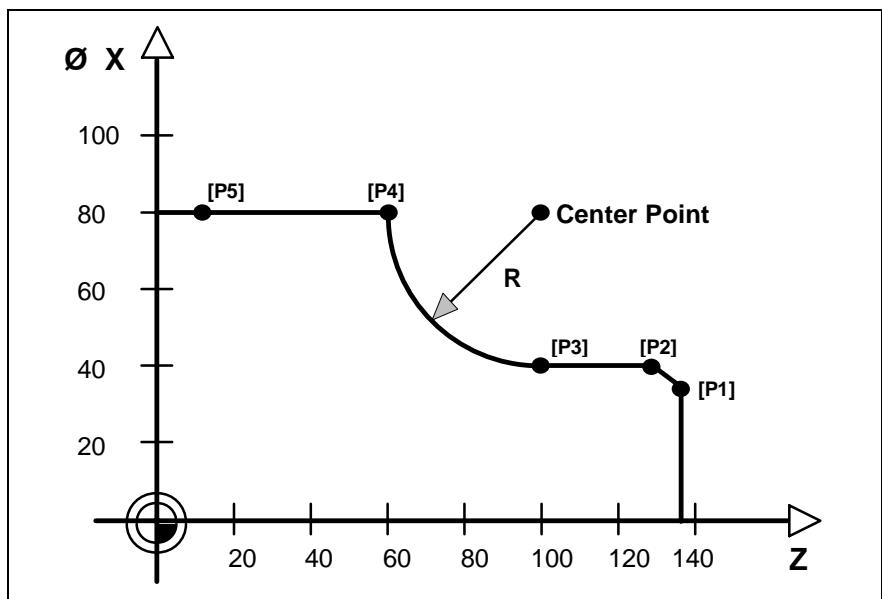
Circle radius programming on lathe, behind center of rotation
